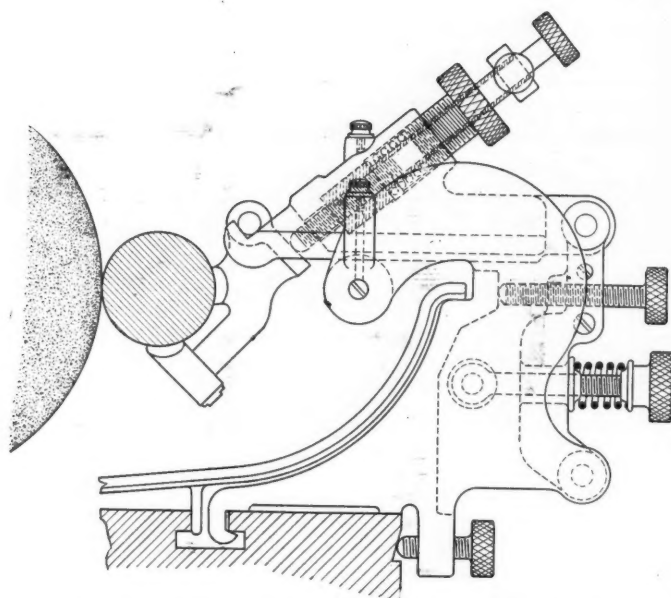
A form of back rest used in cylindrical grinding. (Brown & Sharpe design)
